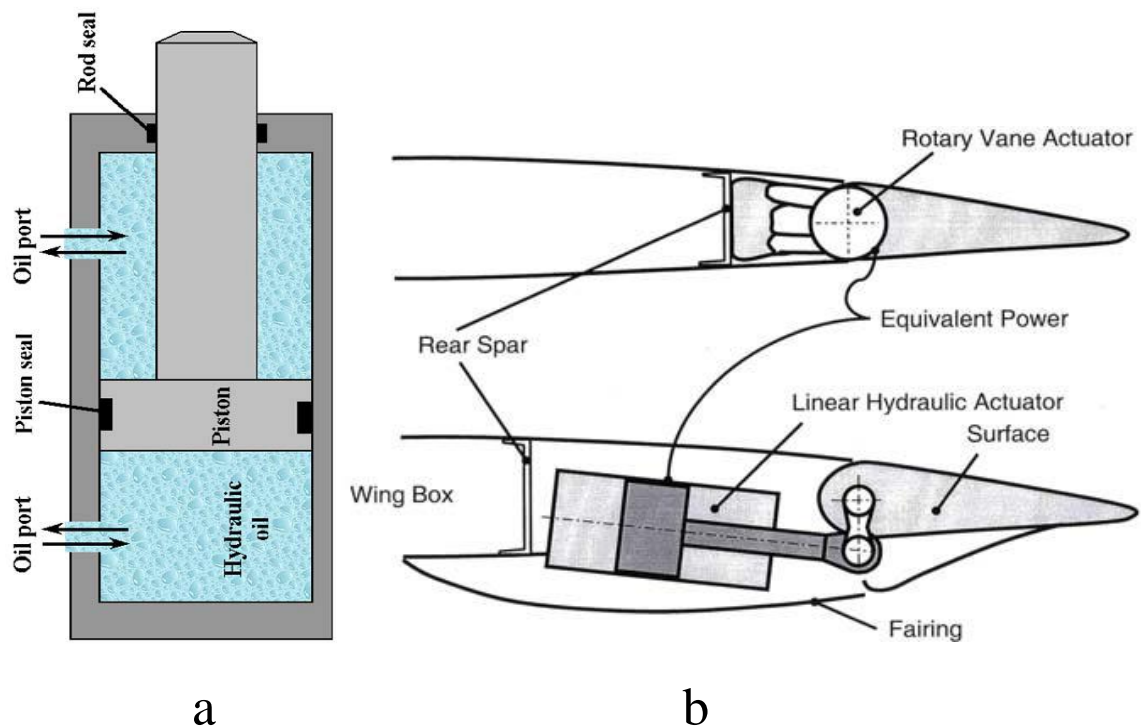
(a): piston seal and rod seal of linear actuator, (b): Aircraft wing control surface operated via classic linear hydraulic actuator and rotary actuator [14].
